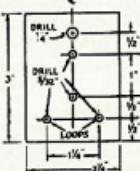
The insulating mounting for the driven element is made from a piece of $\frac{3}{8}$ -in. Plexiglas, cut and drilled as indicated.
